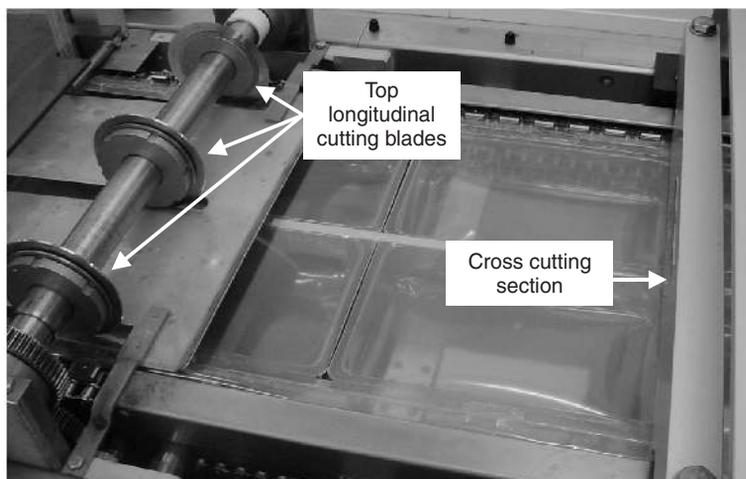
Cutting section on thermoform fill seal machine. (Courtesy of Multivac.)
